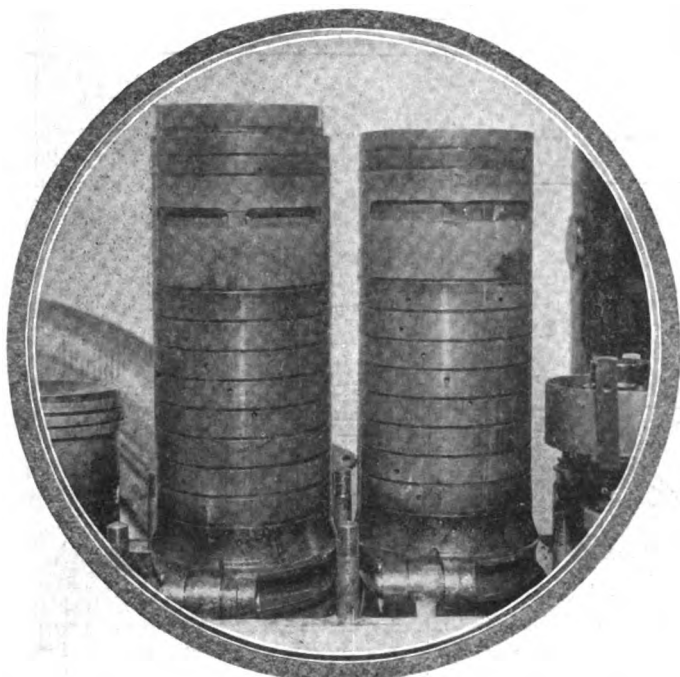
Appearance of the sleeves of the Stoddard-Dayton-Knight motor, intake side, after having run three thousand miles
